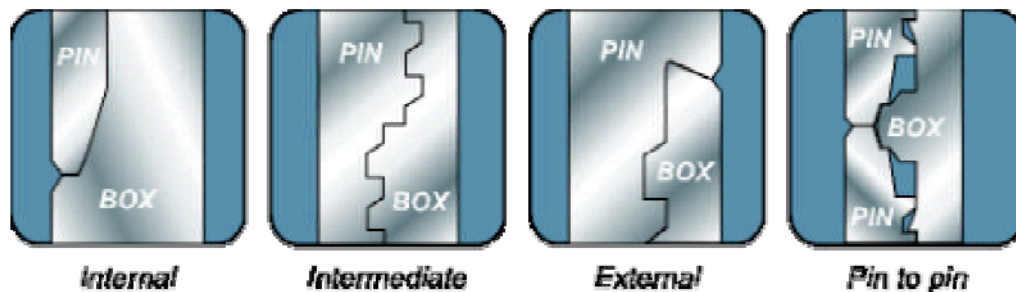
Types of metal-to-metal shoulder seals⁴
